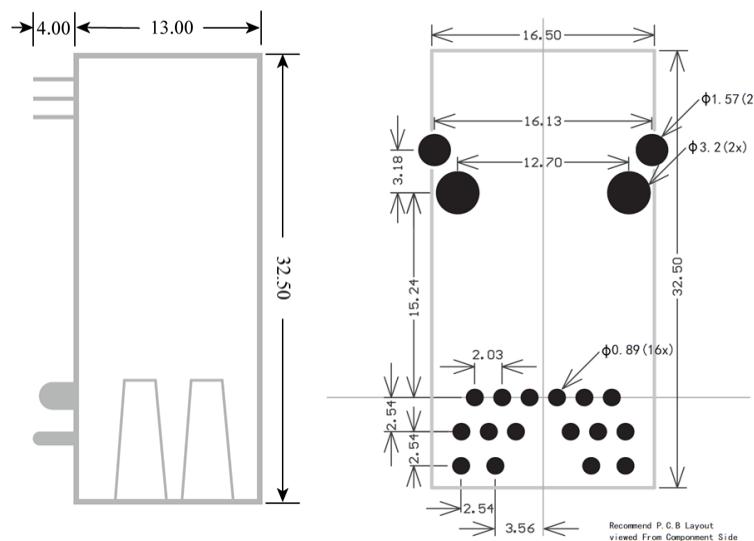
Mechanical dimension diagram of WIZ-IP20
